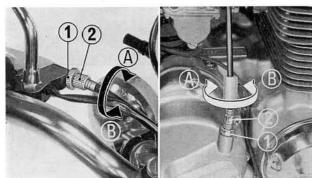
① Lock nut (2) Clutch cable adjuster
